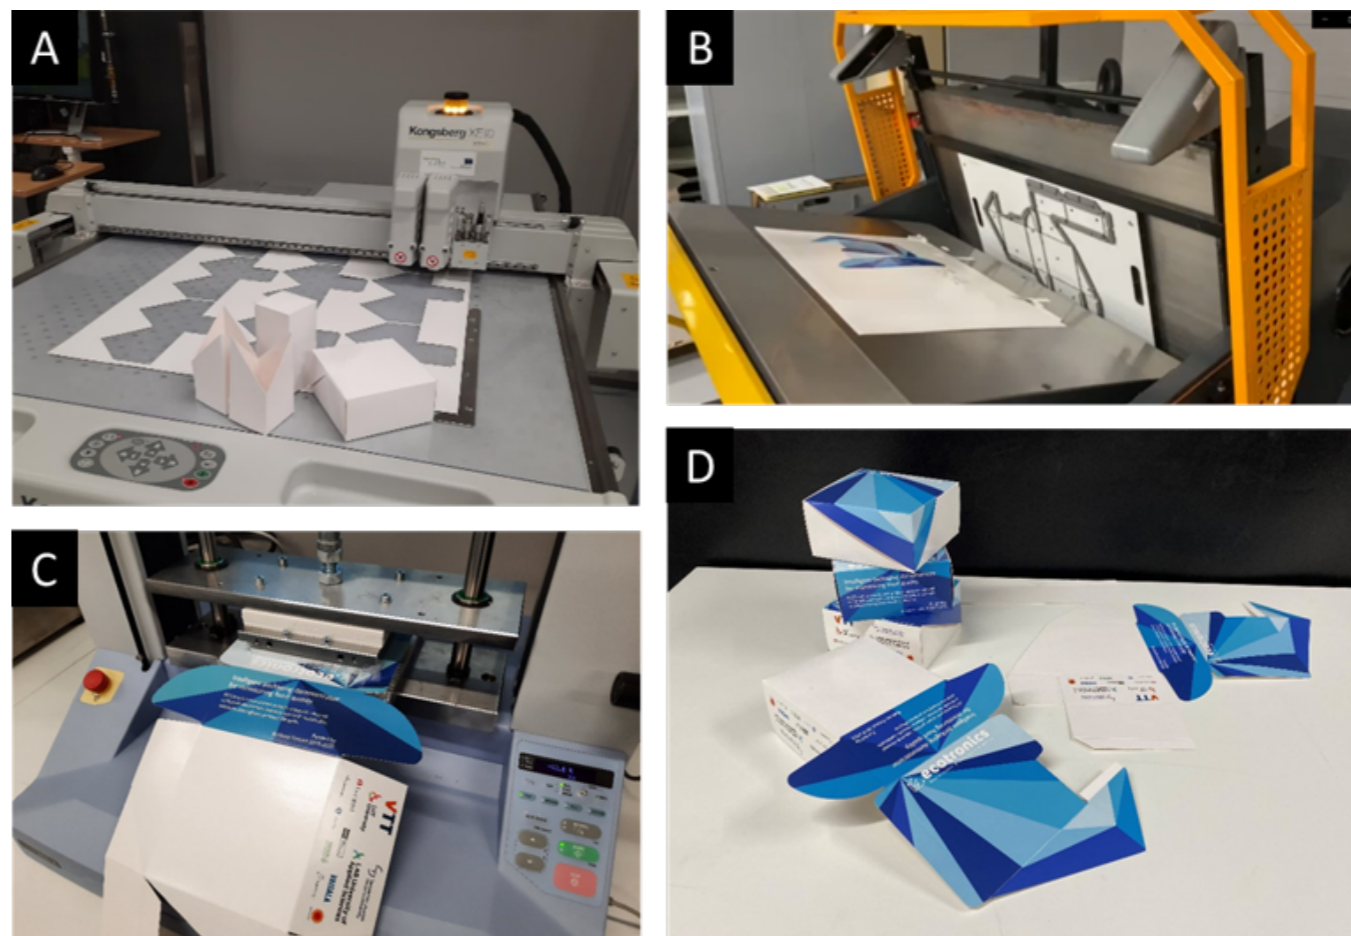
Stages in the production of demonstrator packages in LUT Packaging Technology: testing of prototypes (A), die cutting of printed blanks (B), embossing of package lids for smart label placement (C) and final assembly of demonstrator packages.
